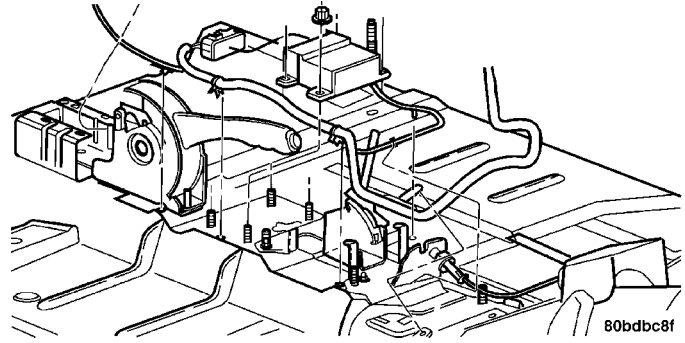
AIRBAG CONTROL MODULE (ACM) REMOVE/INSTALL
